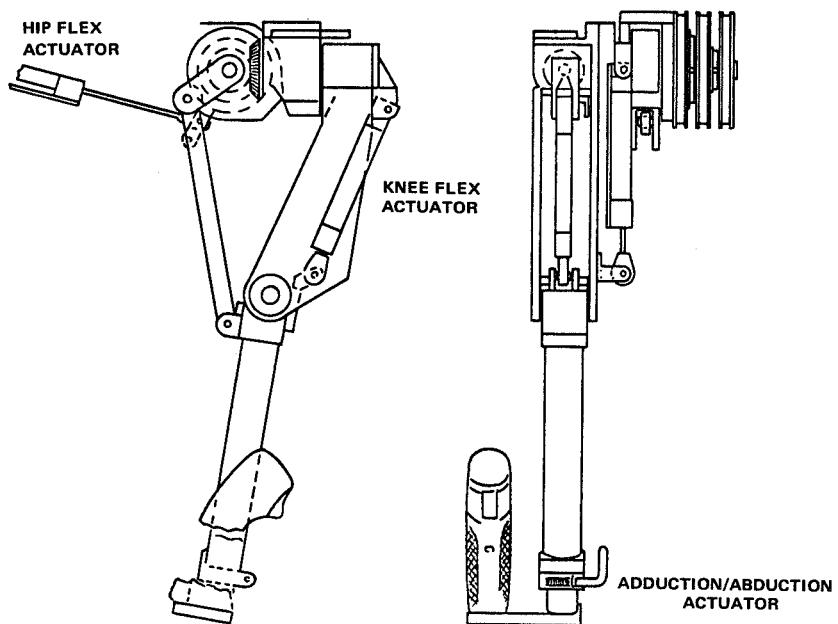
Schematic drawing of a master control for a walking machine.<sup>70</sup>
